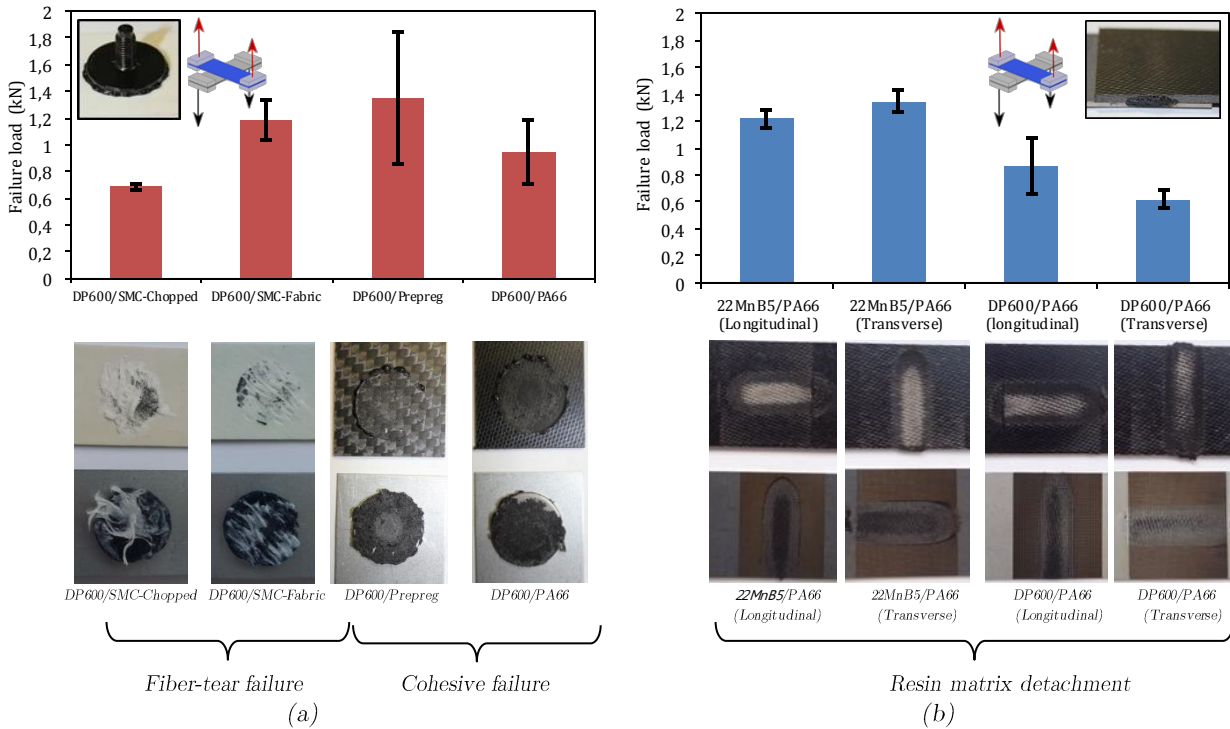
Failure load and failure modes of stud bonding specimens (a) and laser welding specimens (b) in cross-tension test.
